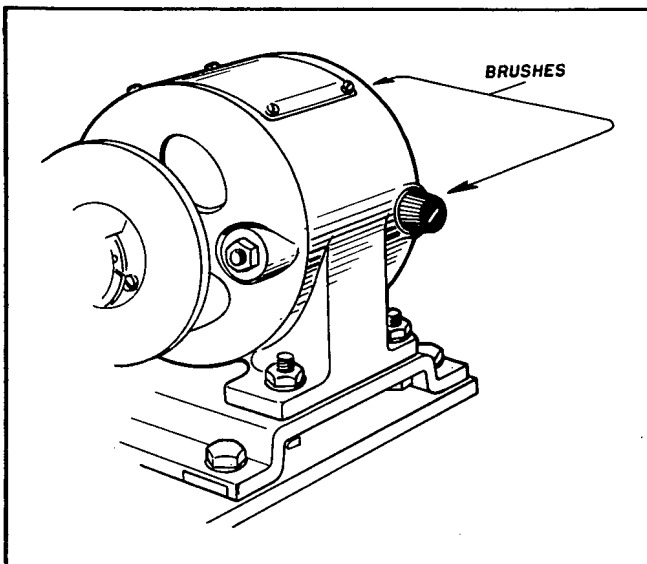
Slewing Motor Brushes in Bearing Indicator
